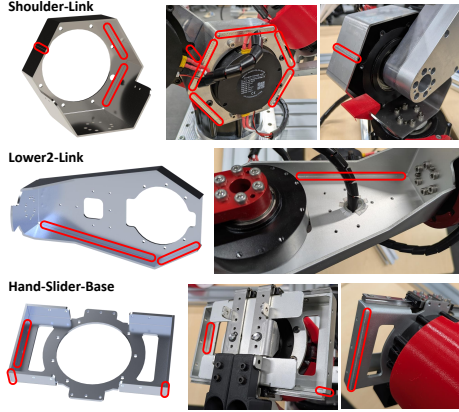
Details of sheet metal welding for the Shoulder-Link, Lower2-Link, and Hand-Slider-Base. The welded sections are highlighted in red.
